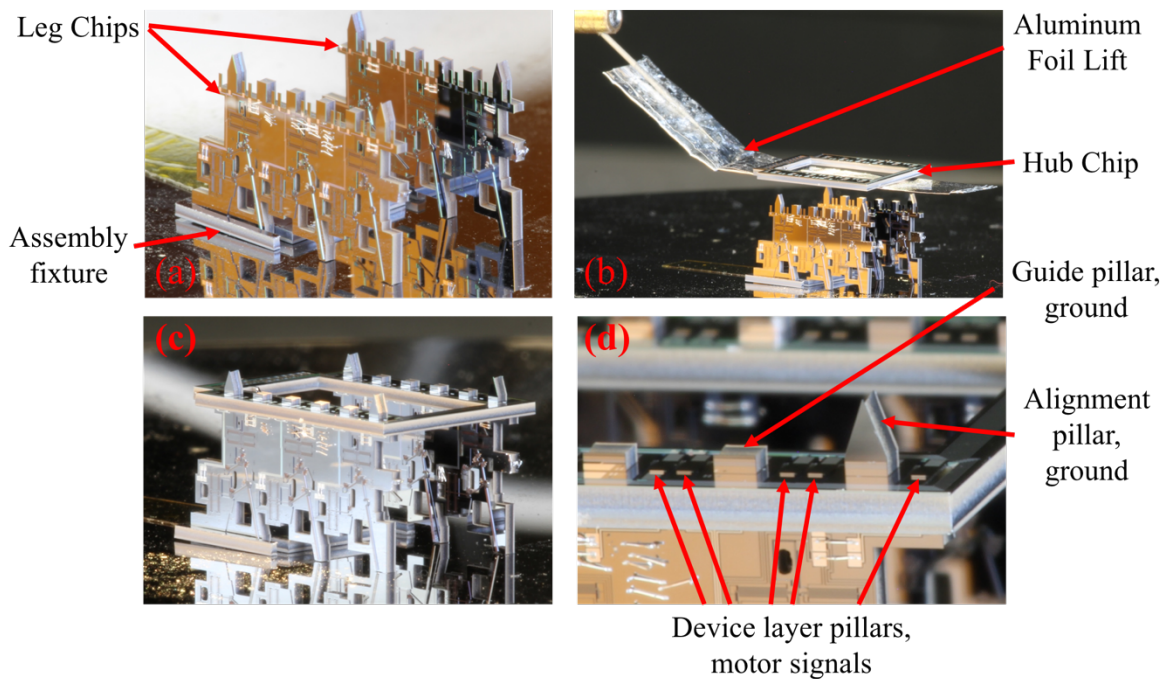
The assembly of the robot (a) The leg chips are held upright in the assembly fixture and are placed underneath a microscope at a probe station (b) The hub chip is placed onto an aluminum foil lift that is glued to a probe tip on a micromanipulator. The holes in the hub chip are aligned to the pillars on the leg chips through the microscope (c) The hub chip is dropped into place and the aluminum lift is removed (d) The pillars are visible through the holes of the hub chip. After the structures are placed correctly, silver epoxy is used to join the pillars and the base around the holes on the hub chip. The assembly is then cured on a hotplate
